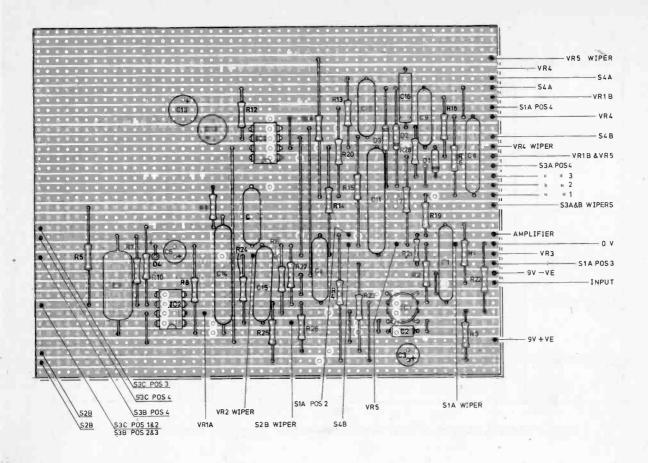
Stripboard cutting details, component layout and interwiring between the component board and panel mounted components
